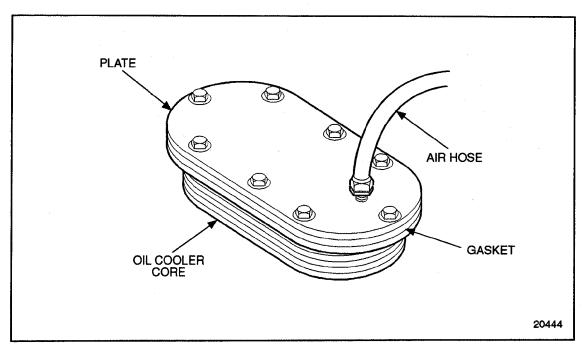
Preparing Oil Cooler Core for Pressure Test
